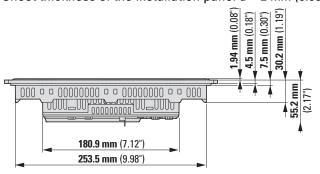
Dimensions for 10.1" rear (panel) mounting devices in mm (inches)XV-313-..-...-A00-..
